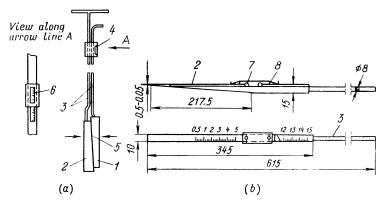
Special (a) and wedge (b) feeler gauges
